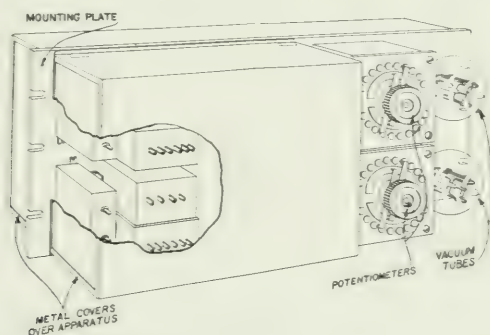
Typical Assembly of Panel Mounted Repeater Set
